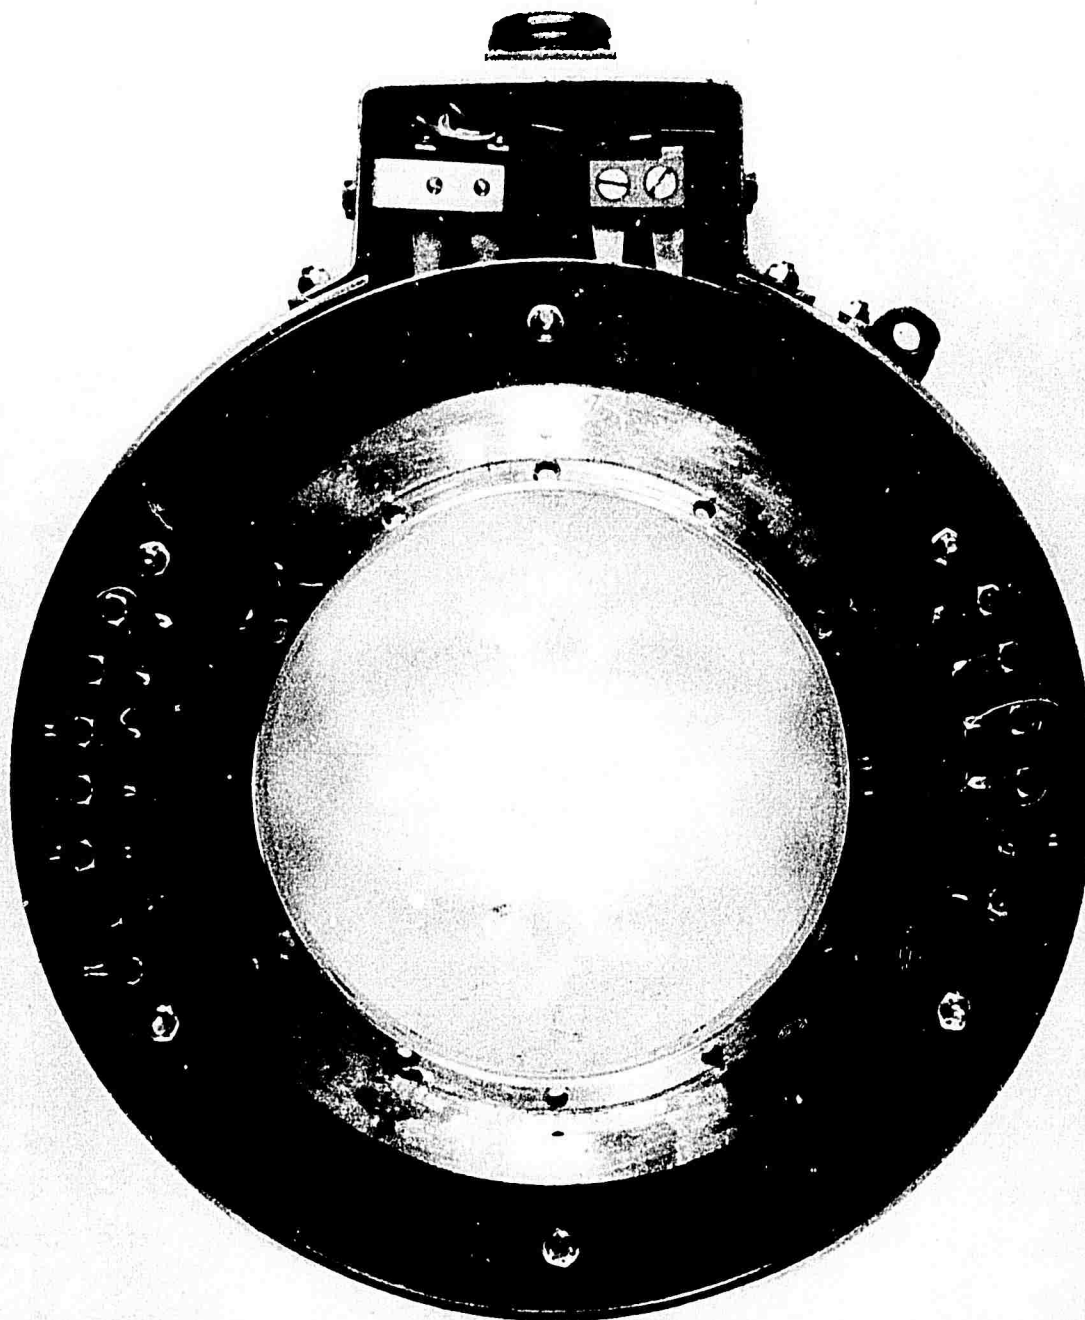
SLIPRING AND BRUSH ASSEMBLY
